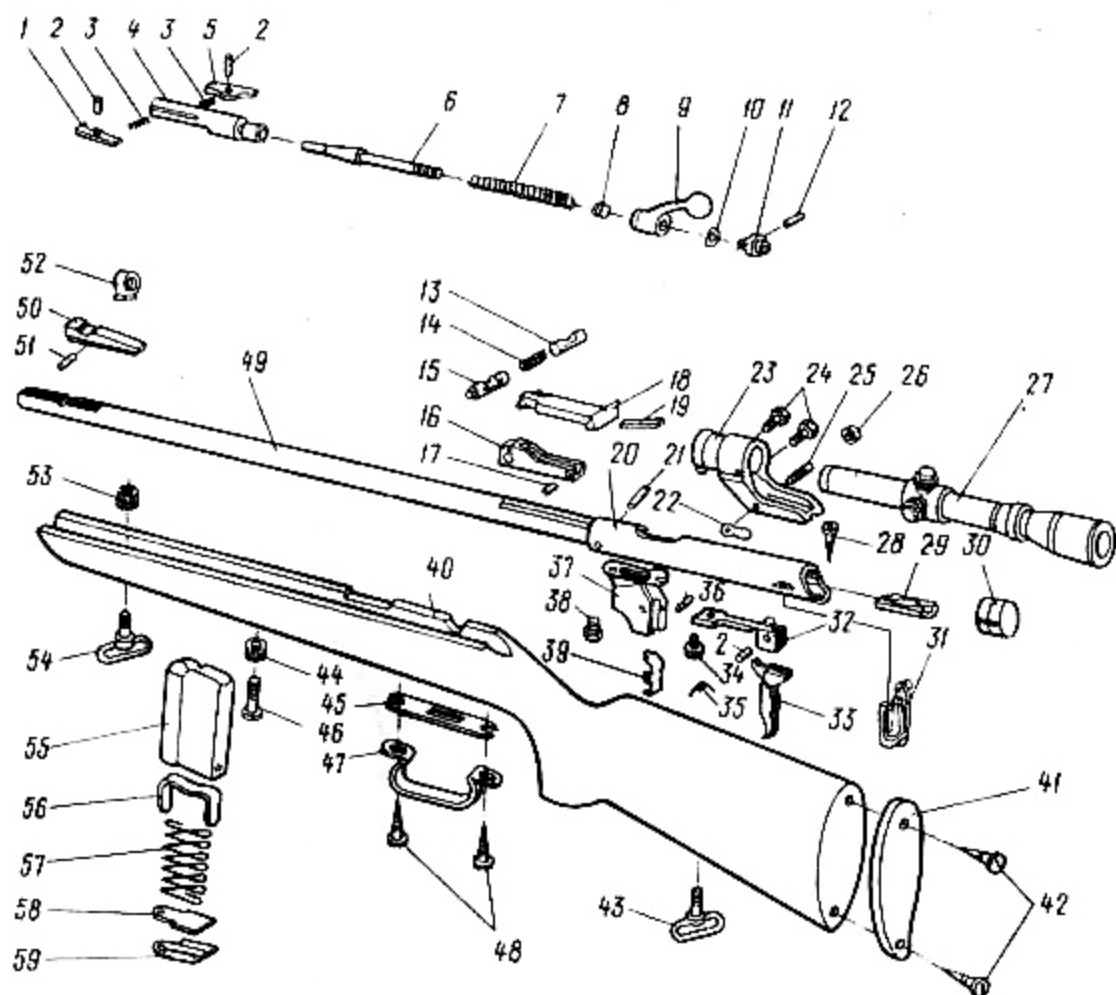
Small-Calibre Carbines. Assembly Units and Parts.
